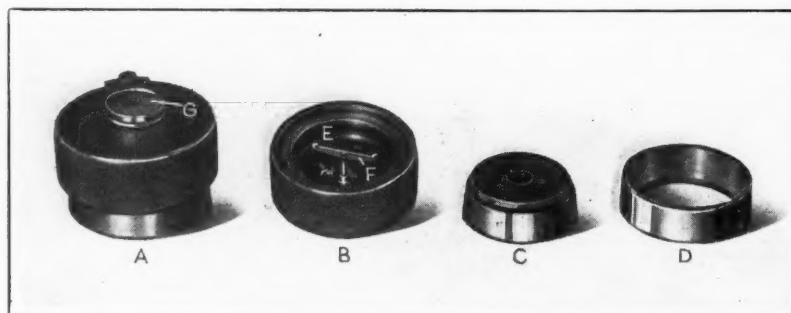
Indicator used for checking the Internal Tapered Surface of Roller Bearing Cups
